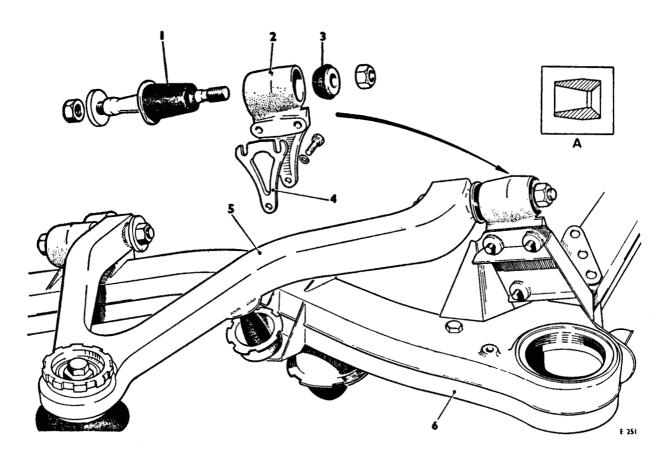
UPPER TRIANGLE LEVERS MOUNTING POINTS
